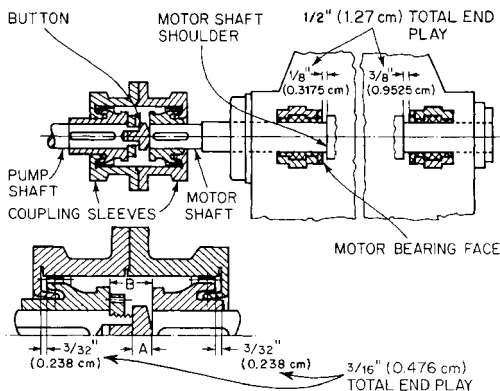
Motor-driven coupling end float limited by insertion of button between shaft end (Flowsolve Corporation)
